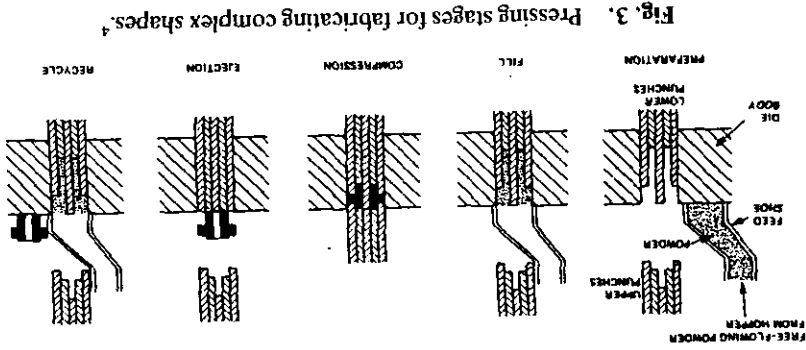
Pressing stages for fabricating complex shapes.⁴
